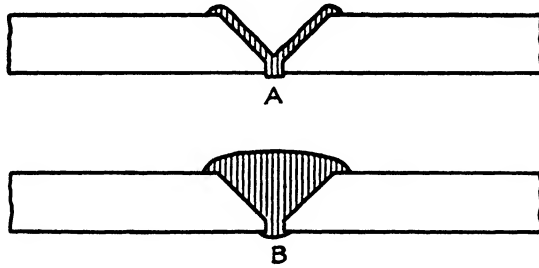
In braze welding, first heat the parts to a red heat and "tin" them with bronze from a bronze welding rod. Then add bronze to build up the weld to a suitable size. Use a slightly oxidizing flame.
